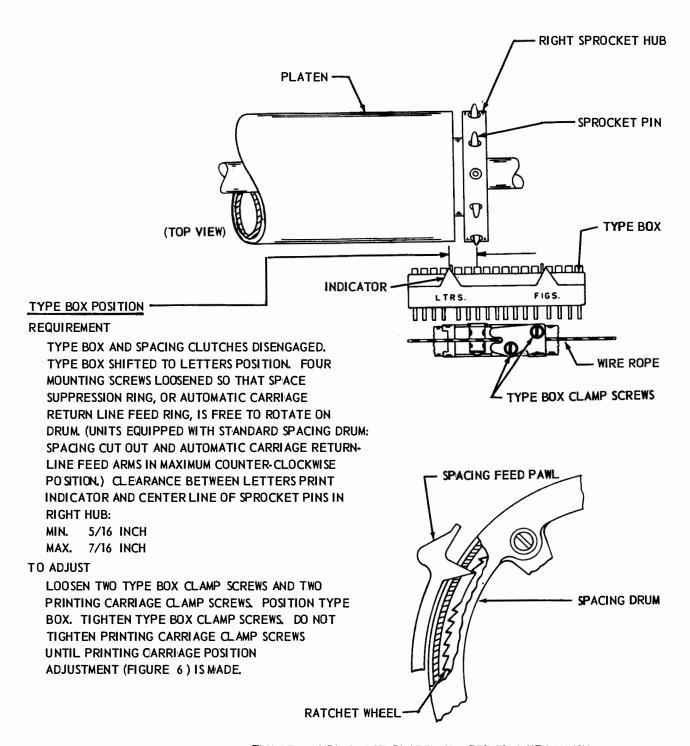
TYPING UNIT, PLATEN AND PRINTING MECHANISM
